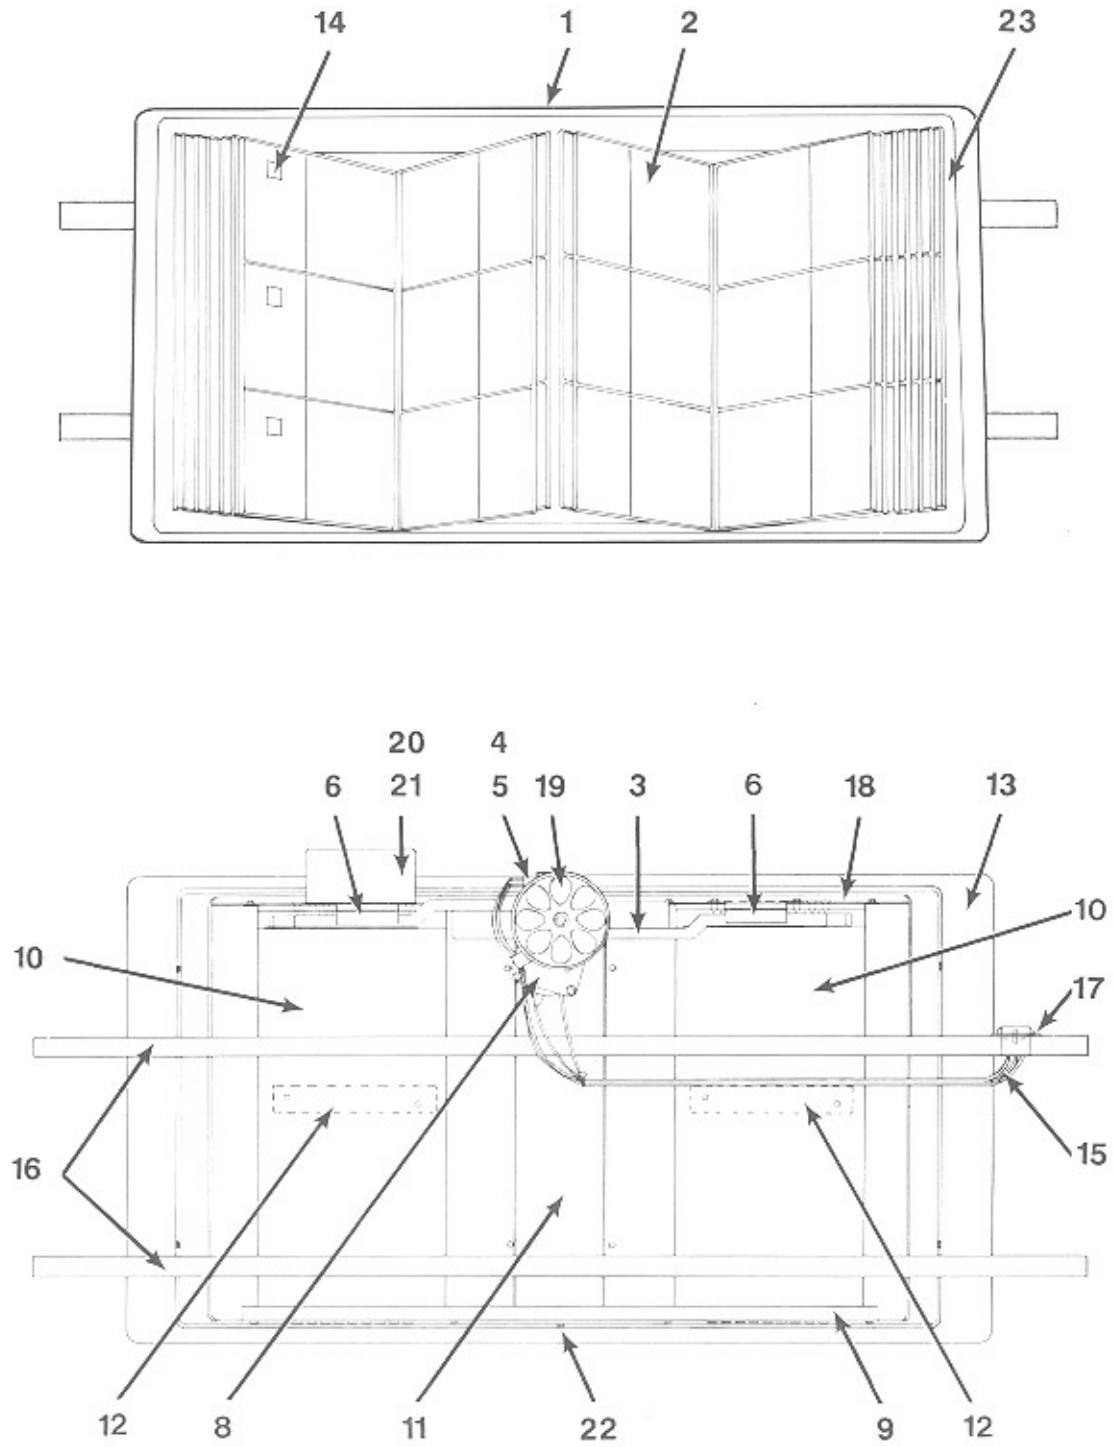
CD-100 Front Door Assembly (Sheet 2)
